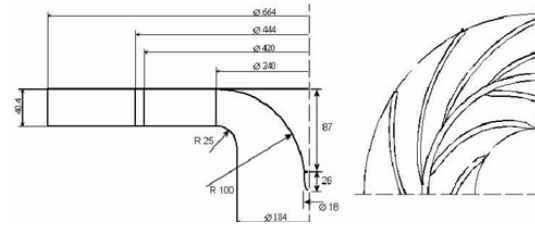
Ercoftech centrifugal pump diffuser vane Dimensions
